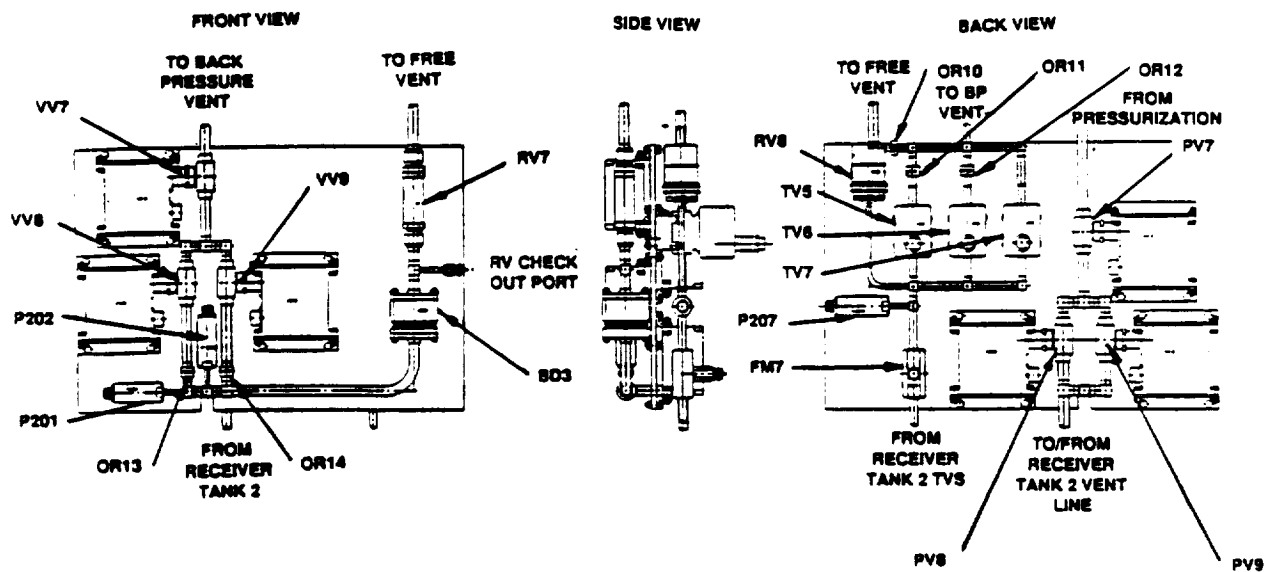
Valve Panel 4 Equipment Design Configuration
